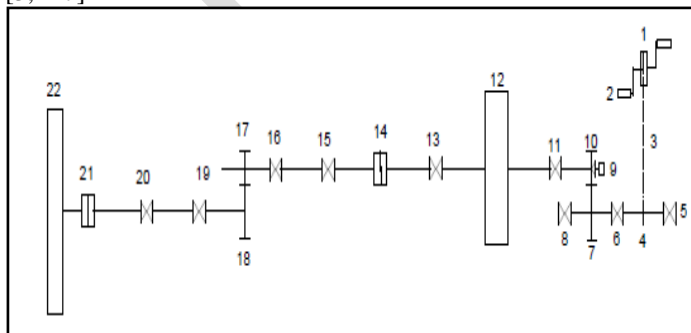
Schematic Arrangement of human powered Wood Chipper Cutter Unit 1-Chain Sprocket, 2- Pedal, 3- Chain, 4- Freewheel, 5 & 6- Bearing for
